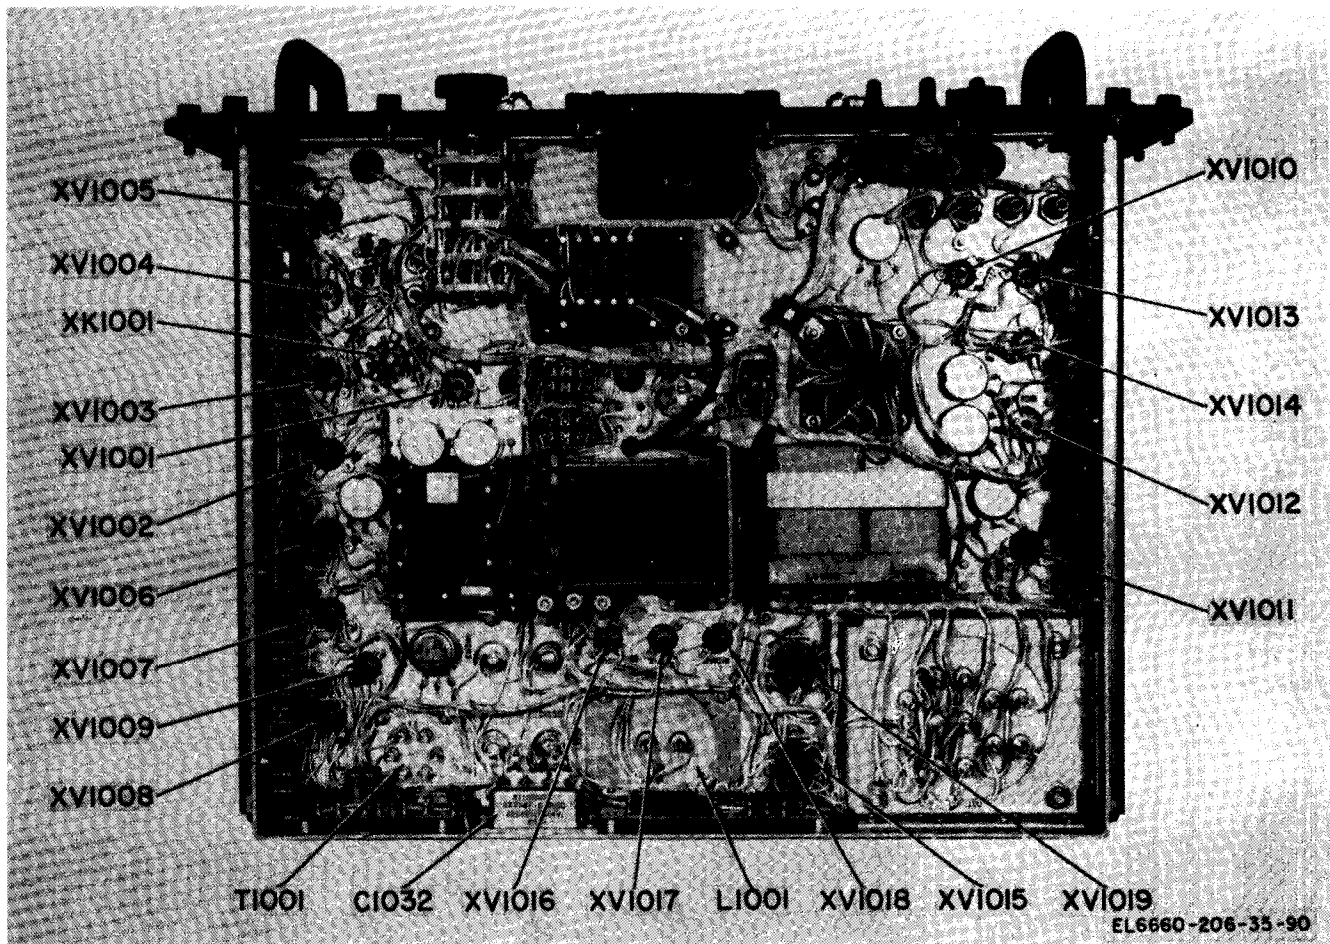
Receiver (R-301D/GMD-I\*\*), bottom view, parts identified.
